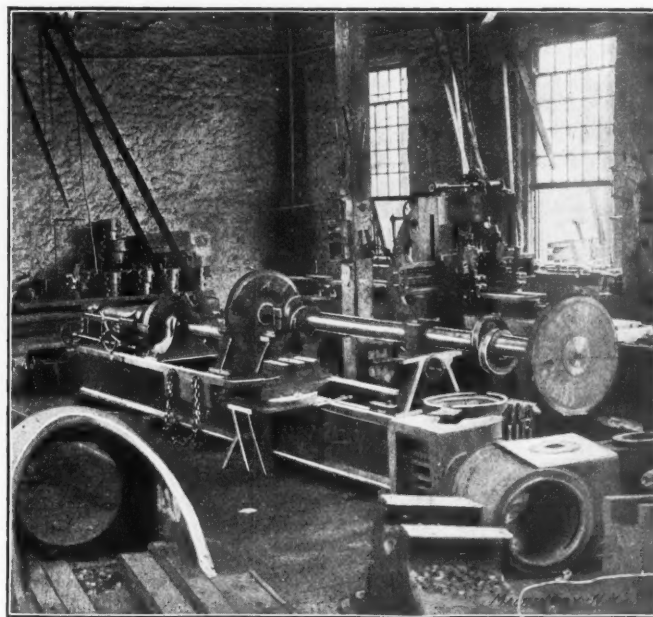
Boring the Crank-pin Hole true with the Shaft.
